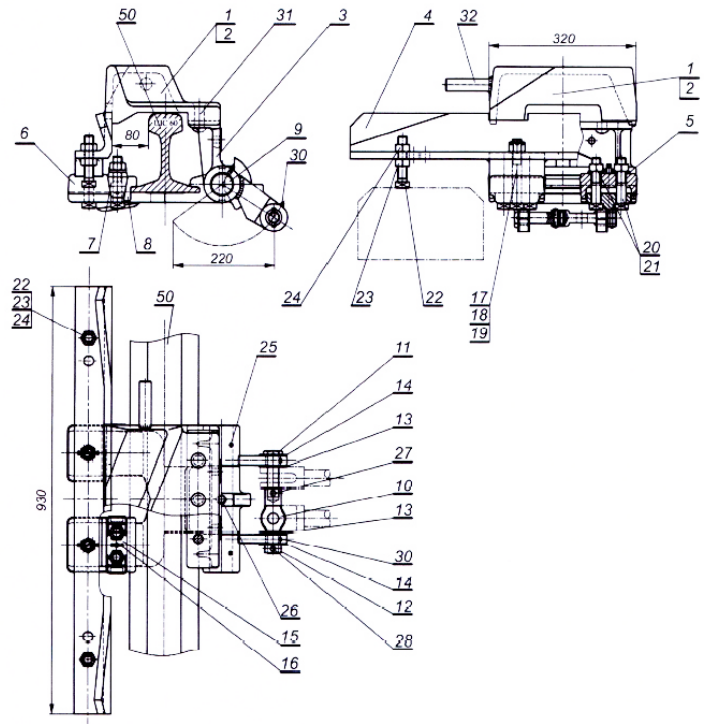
Derailer of the WKN type – overall dimensions and major components
